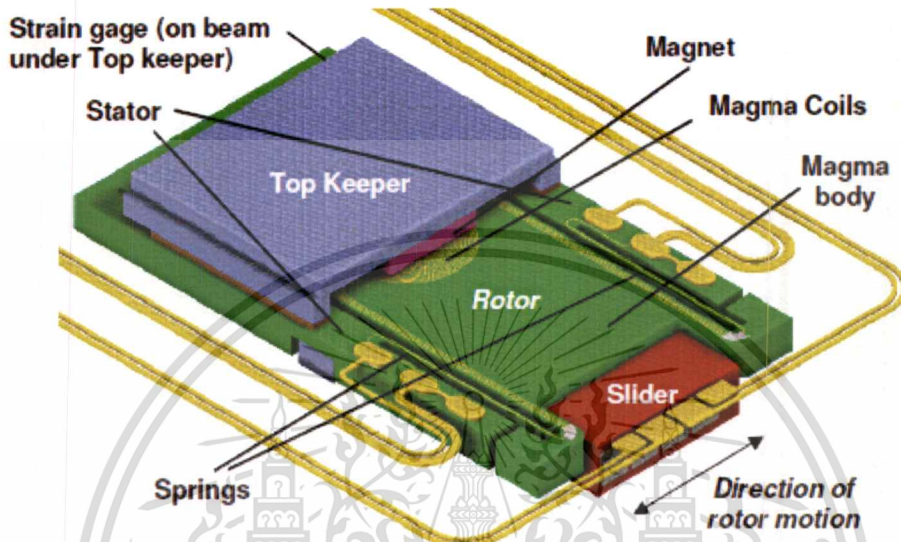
Top view of a MAGMA actuator CAD drawing
